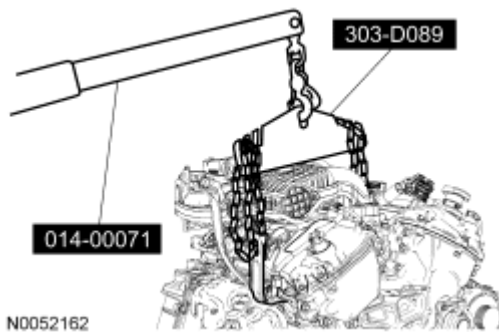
Removing Engine & Transaxle From Lift Table Using Special Tools (303-D089, 014-00071) & Suitable Engine Crane
